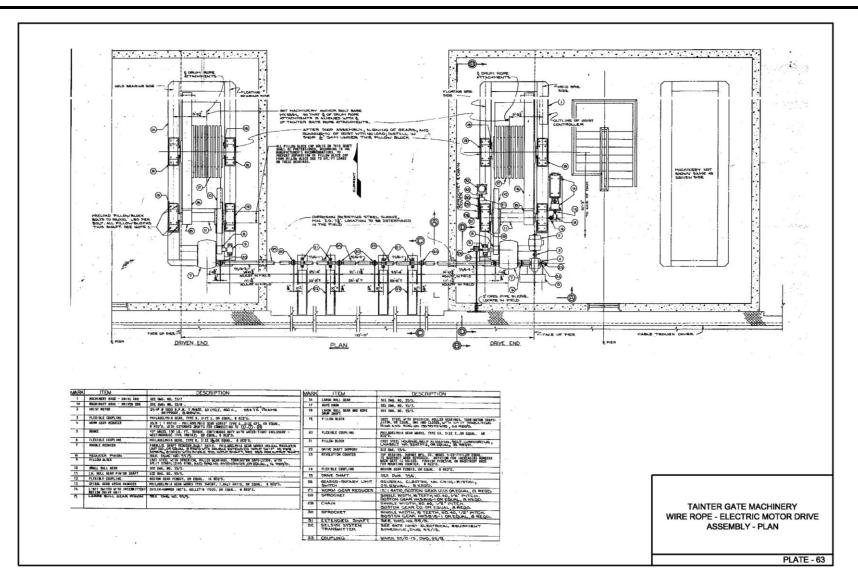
Plate 63: Tainter gate machinery, wire rope-electric motor drive, assembly – plan
